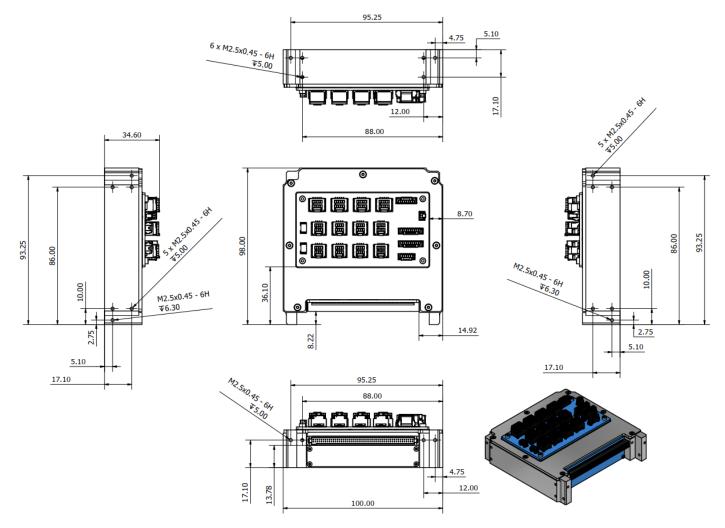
Indicative Dimensions of the Backplane CubeADCS Core
